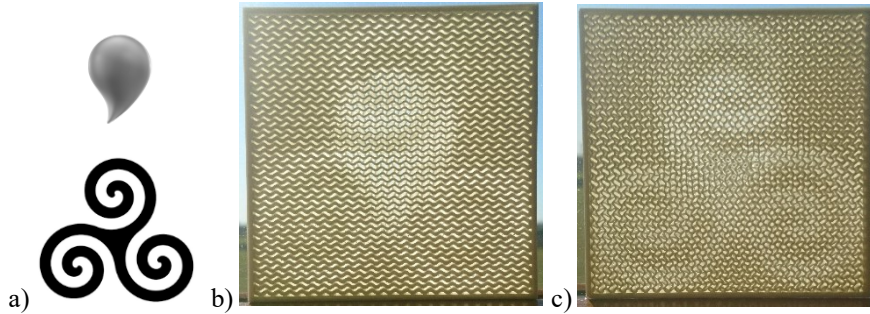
a) Images used in this case study; b) printed component top side and c) bottom side.
